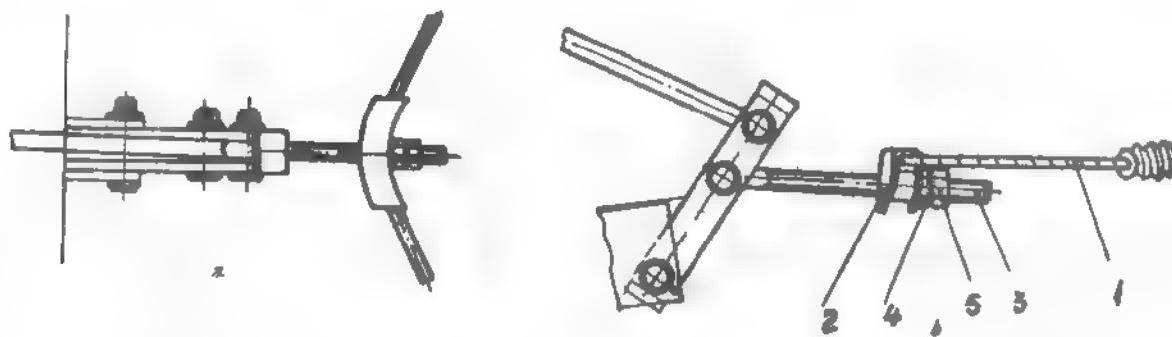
BOWDEN CABLE TENSION ADJUSTING SYSTEM FOR HAND BRAKE CONTROL.
